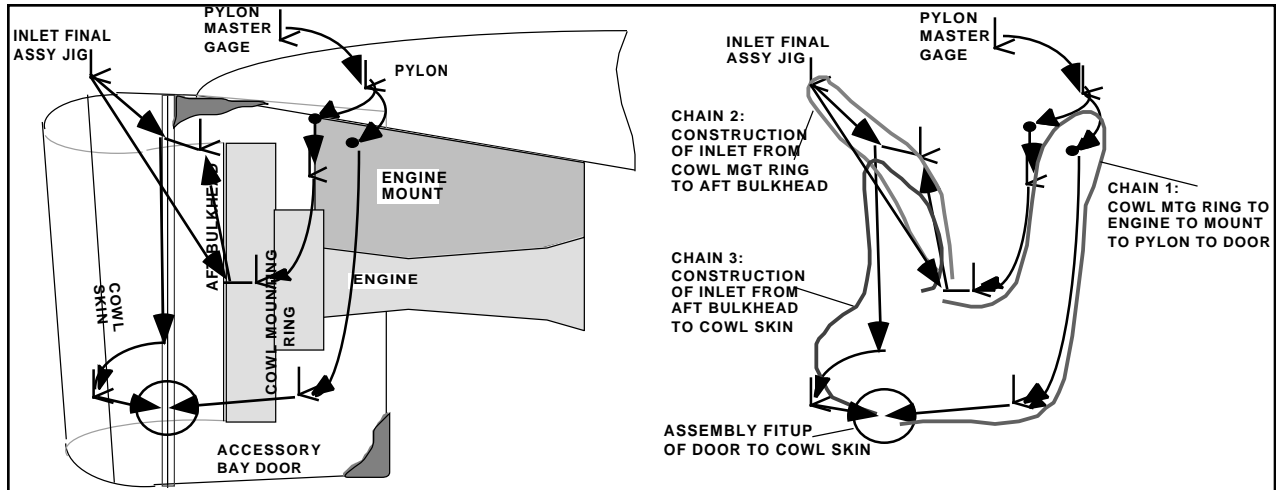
Contact Chain for Aircraft Engine Inlet. The contact chains link a series of parts together. Each node in the chain is the mating of two parts. During assembly, parts obtain positional references from fixtures, so several of the contact chains illustrated here contain fixtures. Points where chains meet are places where important part fits occur. In this case the important fit is between the engine accessory bay door and the inlet cowl skin. The assembly tolerance stems from the initial customer requirement that engines be replaceable in a few minutes. Inlet cowls and engines must be interchangeable, while doors are permanently attached to wings. A close fit between the cowl and the door is required for aerodynamic reasons. (Developed by Timothy Cunningham and Daniel Whitney)
